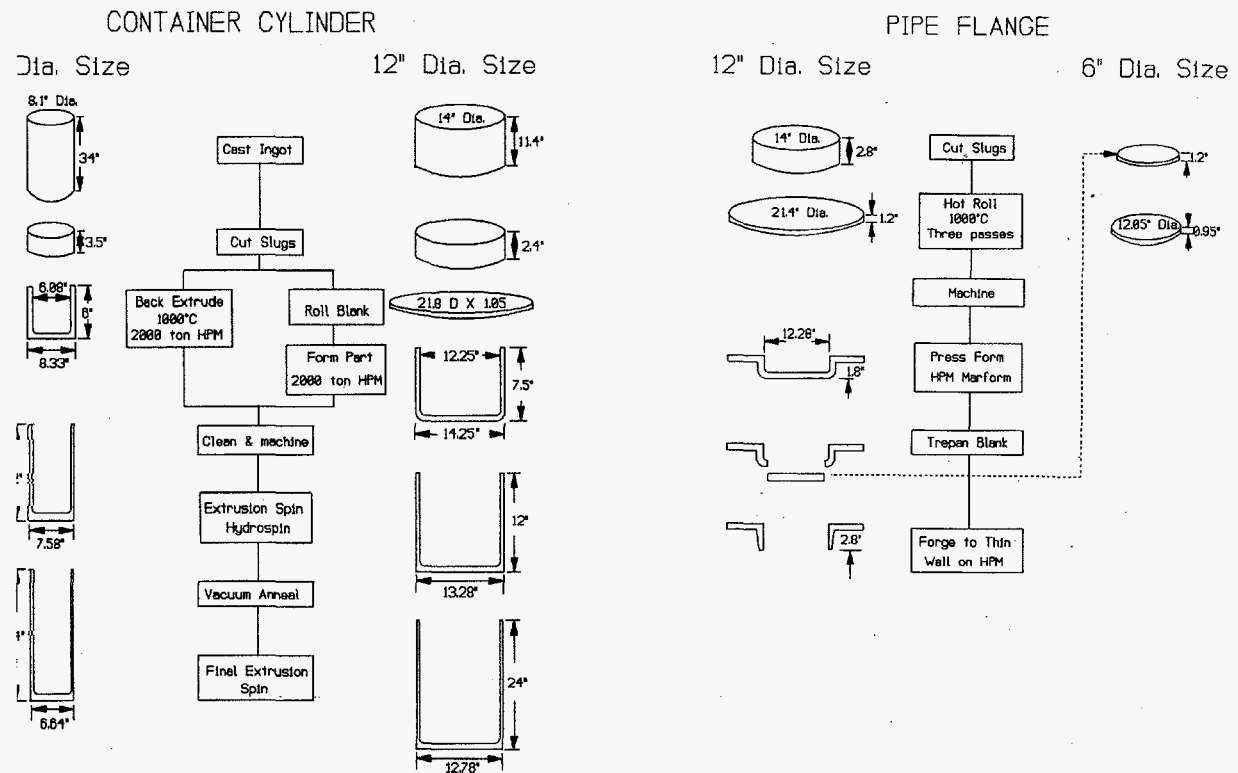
Schematic View of the operations used to produce the seamless body (left) and the flange (right) for the PEACE PIPE.
